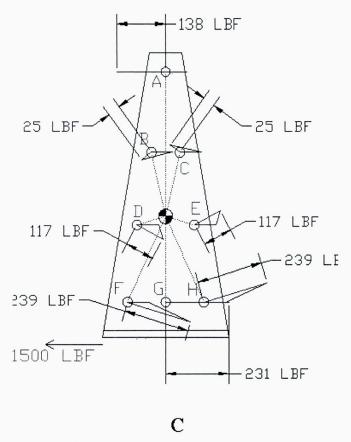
Roof Fitting Bracket - Reactions
